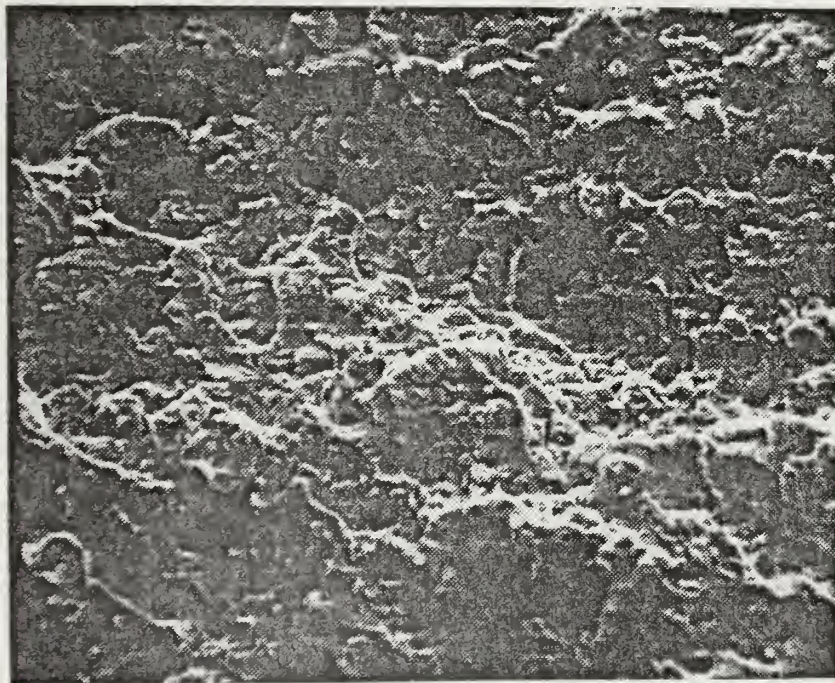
Fractograph of fast fracture zone of Fig. 80, showing shear dimples and tear ridges. The dimples indicate the direction of crack propagation as being from down to up. X1020.
